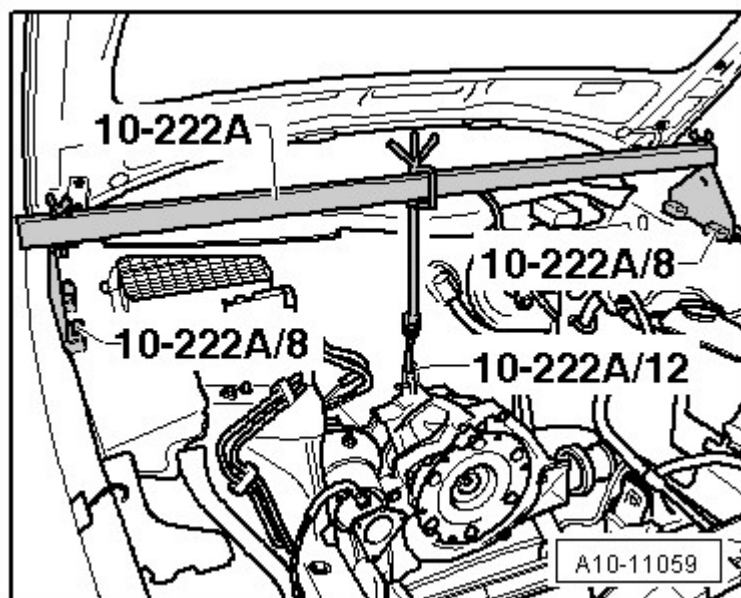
Identifying Adapter Installed On Left And Right Strut Tower
